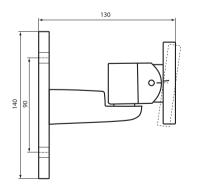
Dimensions in mm of included mounting bracket (with marked angle).
